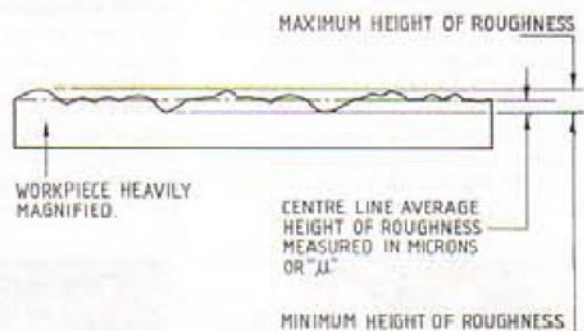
THE MEASUREMENT OF SURFACE FINISH
